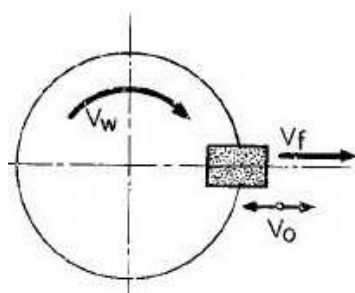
Super finishing of end face of a cylindrical work piece in radial mode
